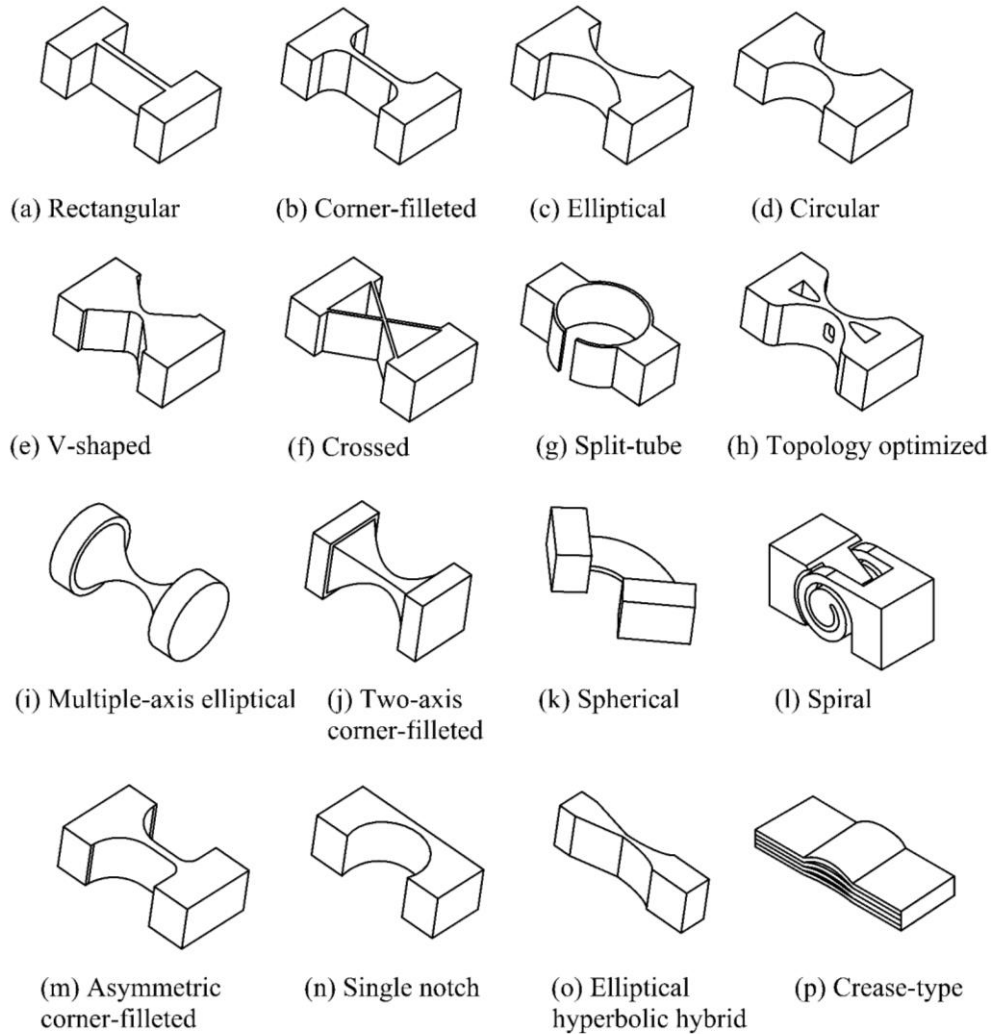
Types of basic flexure hinge: (a) rectangular [39, 40]; (b) corner-filleted [43-45]; (c) elliptical [41, 42]; (d) circular [56, 57]; (e) V-shaped [58, 59]; (f) crossed [60, 61]; (g) split-tube [62, 63]; (h) topology optimized [46]; (i) multiple-axis elliptical [64, 65]; (j) two-axis corner-filleted [66, 67]; (k) spherical [68, 33]; (l) spiral [49, 50]; (m) asymmetric corner-filleted [51]; (n) single notch [52, 53]; (o) elliptical hyperbolic hybrid [54]; (p) crease-type [55].
